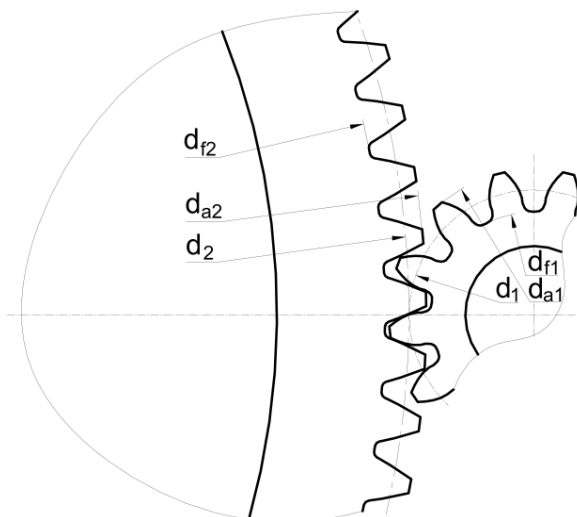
The basic geometric parameter of a pinion and a toothed ring
